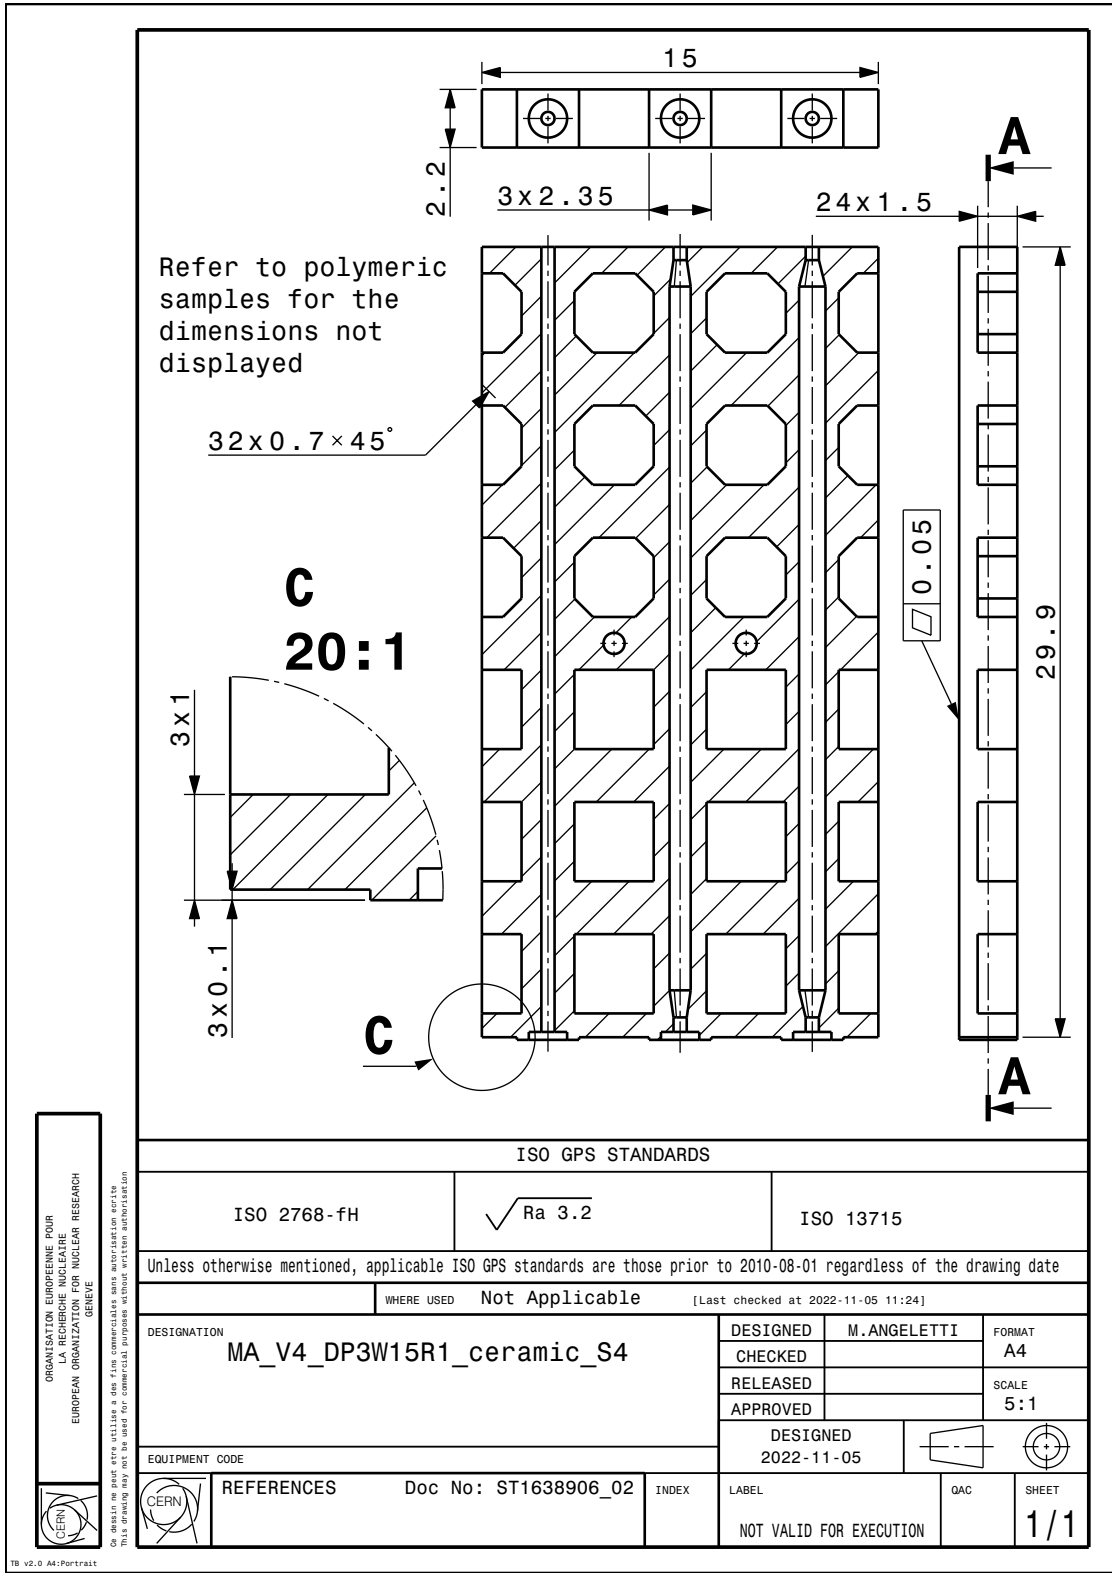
Drawing of the pin-based ceramic sample type 4.
